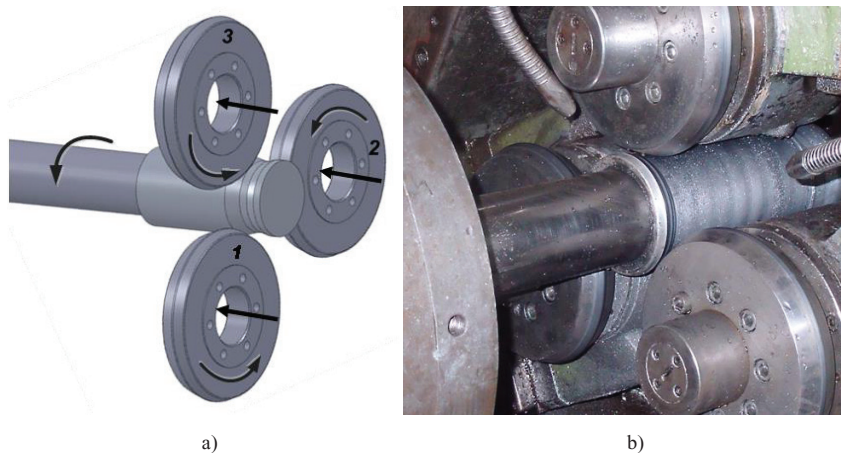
3D model(a) and the real appearance of the tool and workpiece in forming by CFF technology(b)
